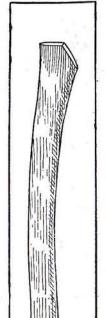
Cut off the end of the handle to obtain a flat surface for driving the handle up.
